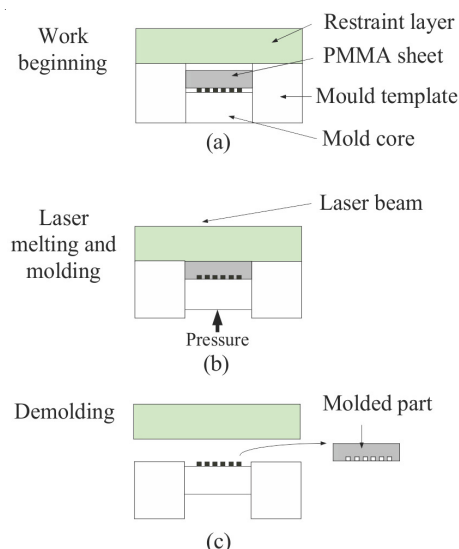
Schematic diagram of the laser-melted mold. (a) Setup (b) Laser melting and molding (c) De-molding
